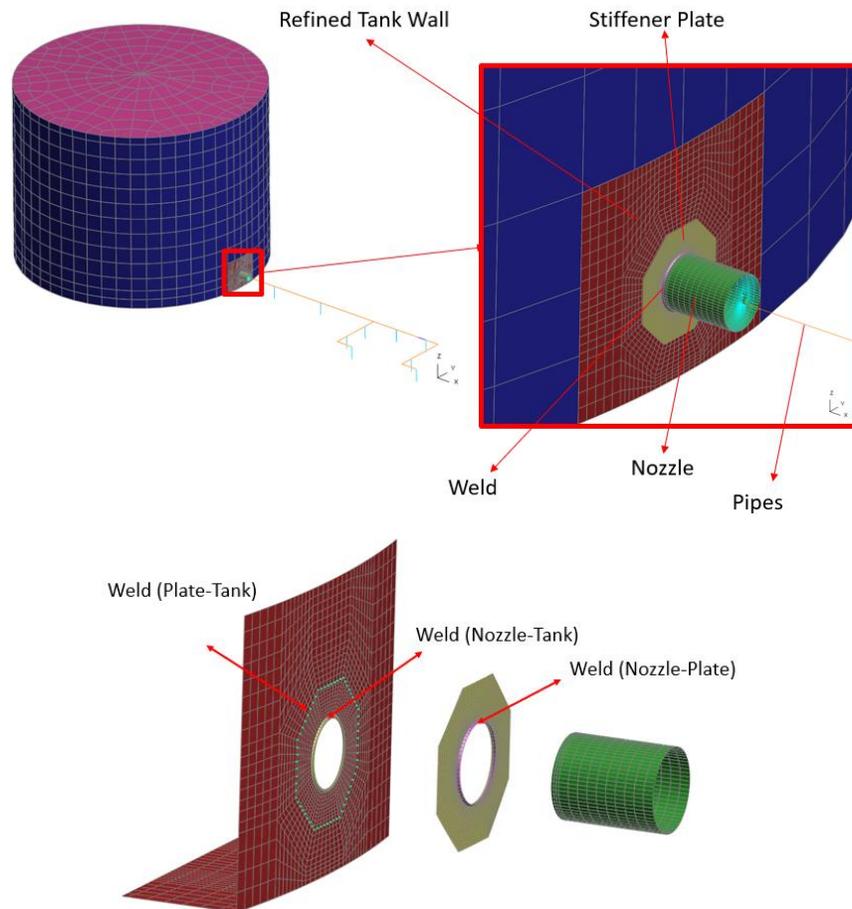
Finite element model of the tank, the nozzle, and the stiffener plate (top) and exploded view of the tank-nozzle connection (bottom)
